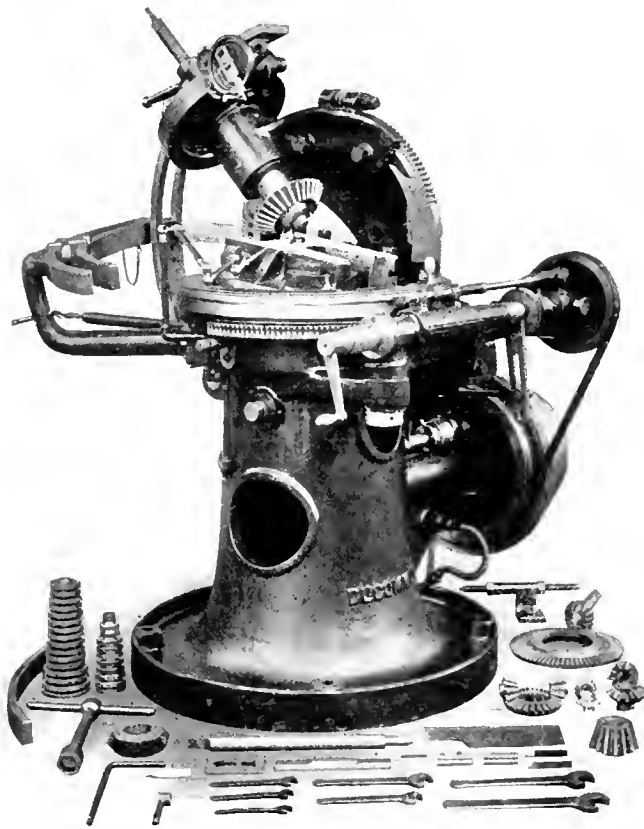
Ducommun Bevel Gear Generator operating Two Tools.
